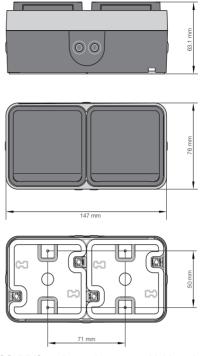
SCHUKO socket outlet 2gang with hinged cover
